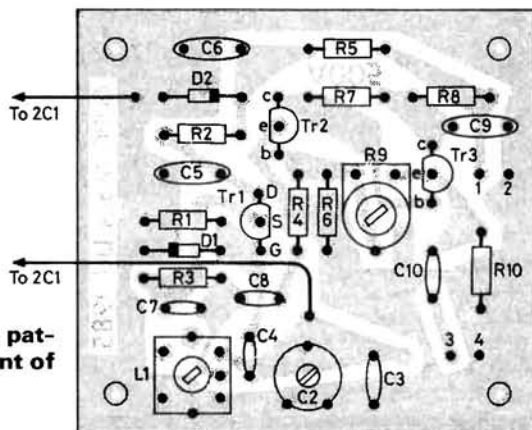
Full-size p.c.b. track pattern and components placement of the v.f.o. board, Board 2
